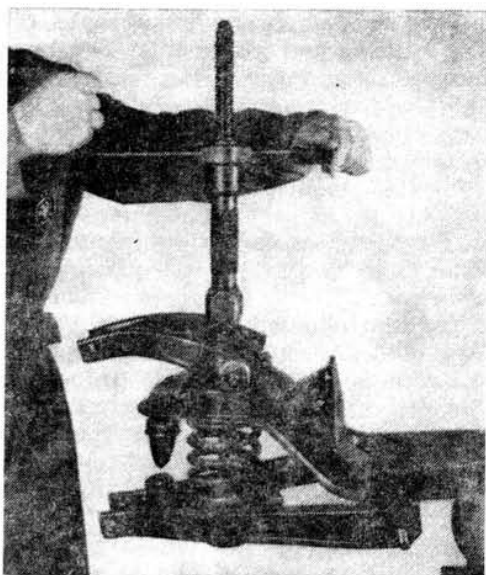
/4 - Compressing Coil Spring Using MP 6-106 Installer
